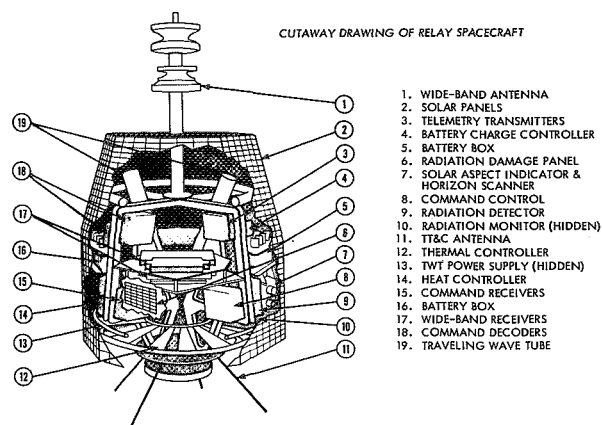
Cutaway drawing of the Relay spacecraft.
